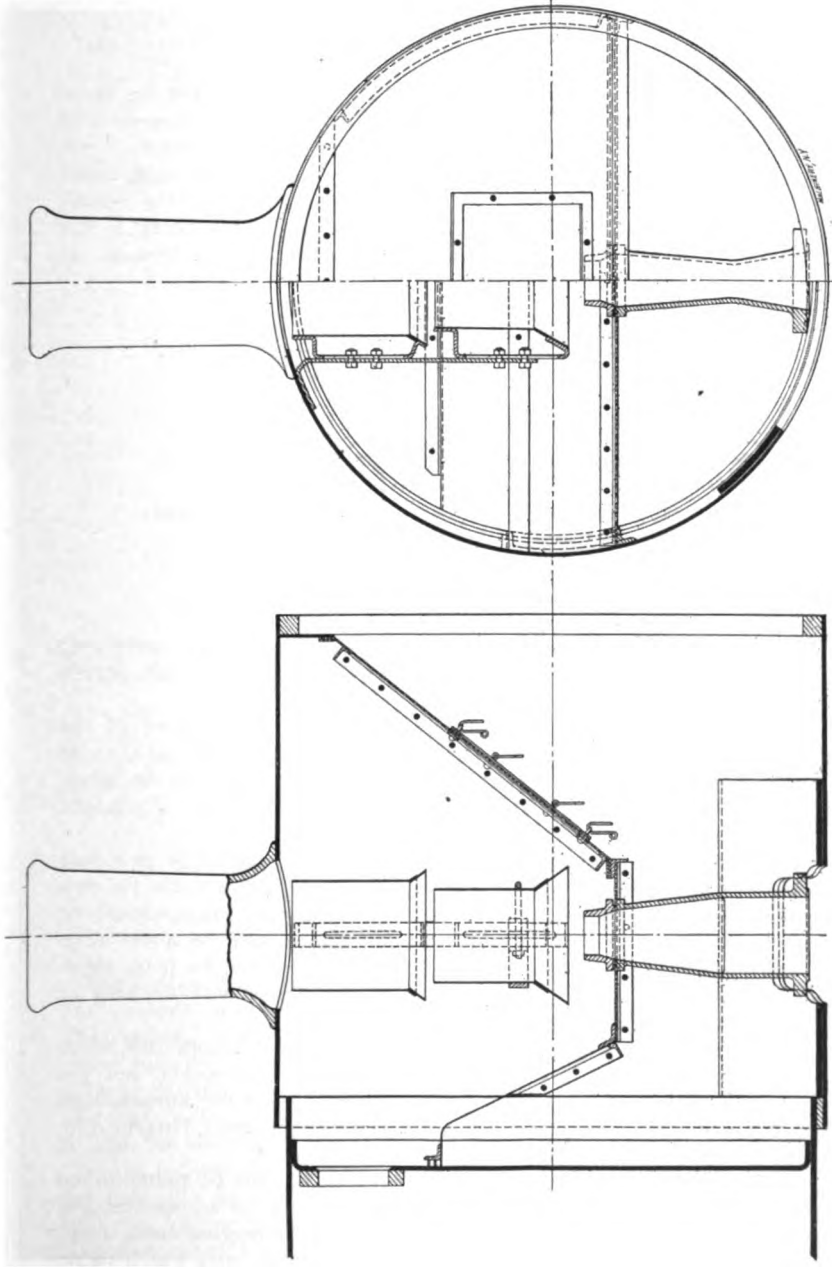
Longitudinal and Cross-section of Smokebox of Express Passenger Locomotive
